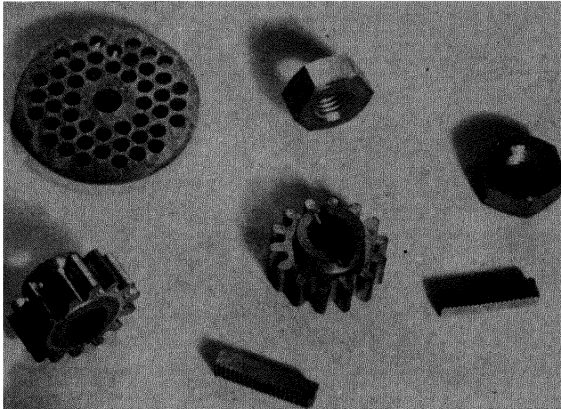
Assortment of gears, racks, nuts, and a perforated plate for a meat grinder produced in Austria from sintered steel (according to Kieffer, Benesovsky, and Bartels<sup>94</sup>).
